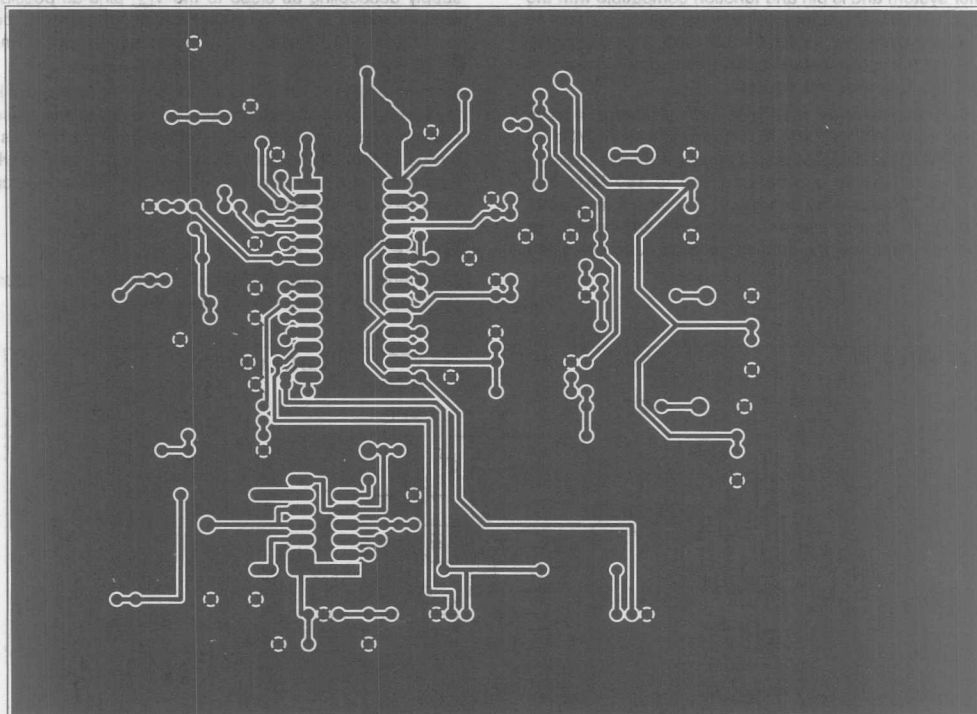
(b). PC board layout of bottom side. Top side of PC board (not shown) is full ground plane.
